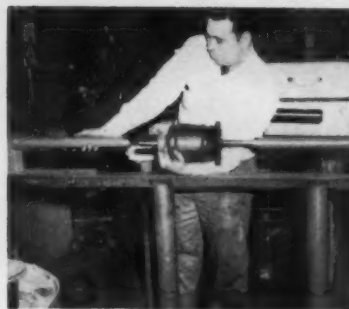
Illustrated: No. 1 for bending 1/2", 3/4" and 1" rigid conduit
